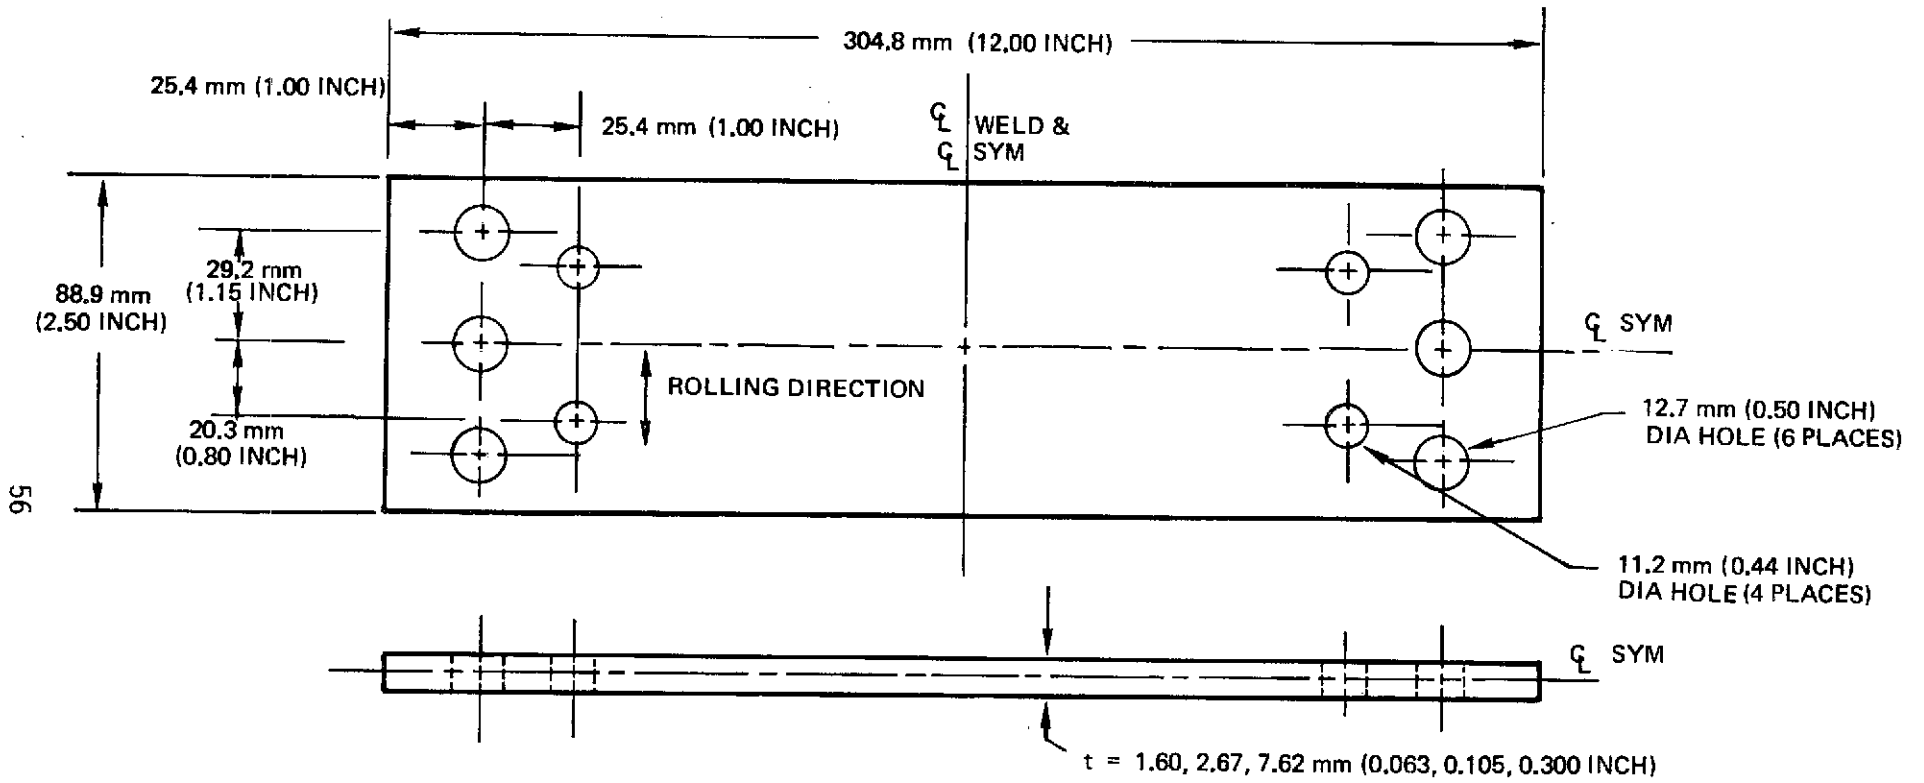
88.9 mm (3.50 INCH) WIDE 2219-T87 ALUMINUM ALLOY WELDMENT SPECIMEN
